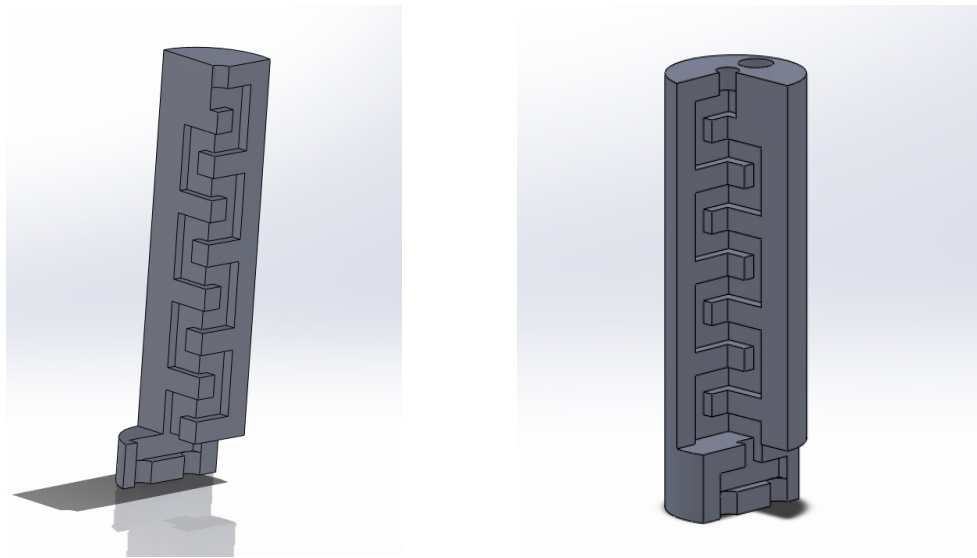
Halves of mixing chamber that can be assembled by injection molding
